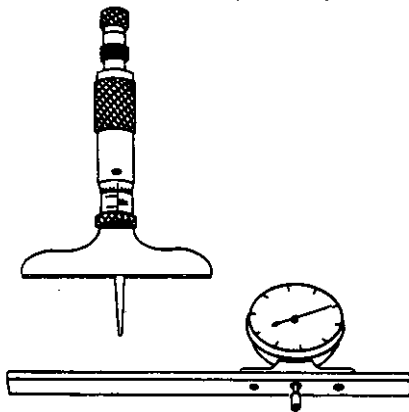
Depth micrometer modified with tapered depth probe labeled, and depth dial micrometer modified with tapered depth probe and extended shoulder (below).
